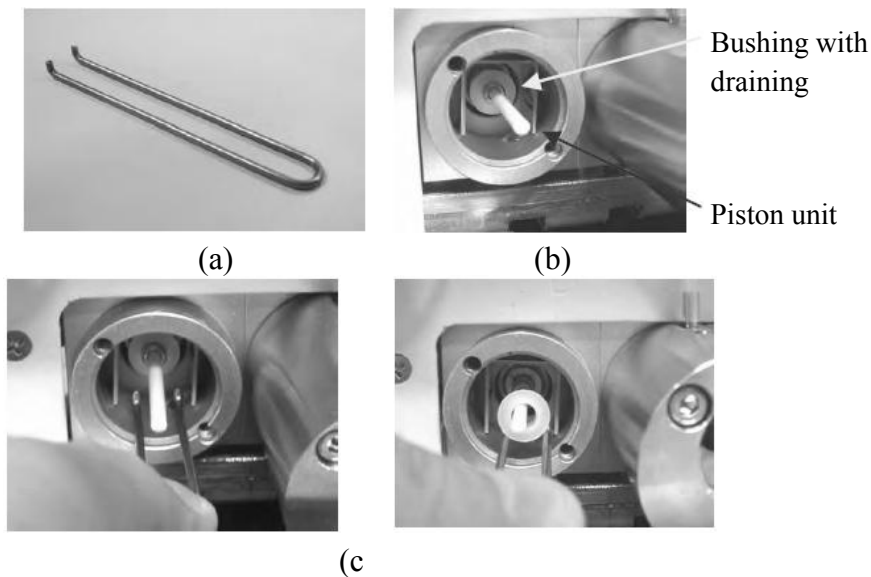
How to remove the bushing (a) extractor (b) piston and bushing with draining device (c) removing the bushing with draining device.
